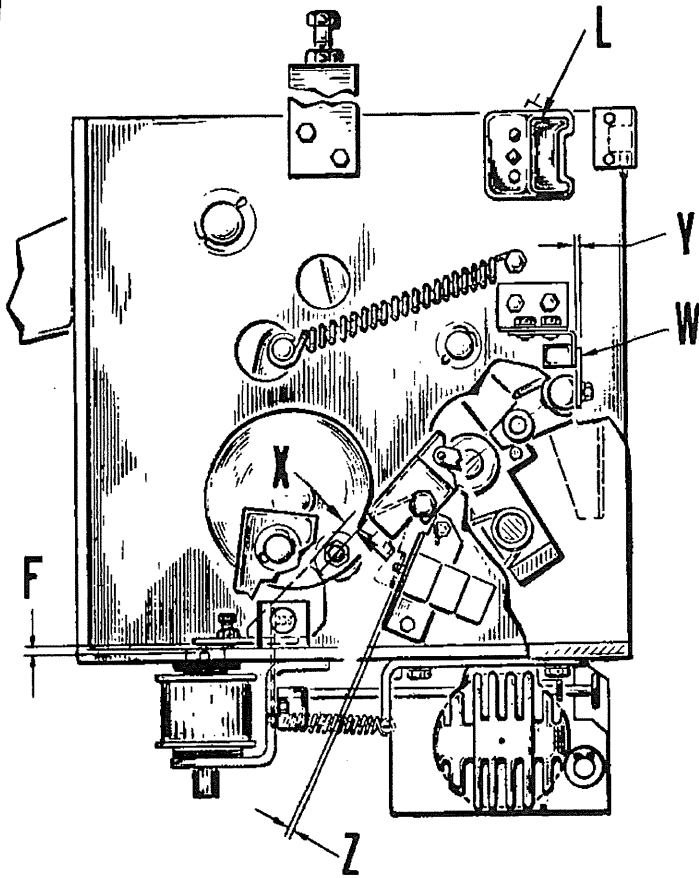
Left Side View Adjustment and Final Clearance Checks
